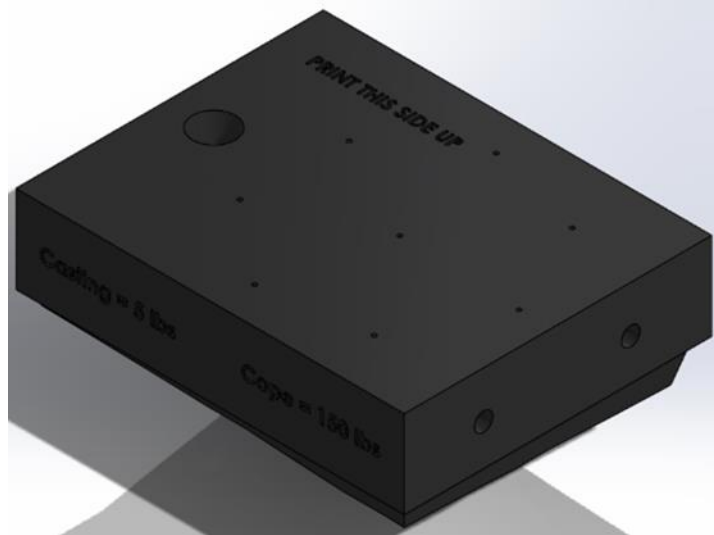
Drawing of Cope for Fluorescent Penetrant Inspection Testing
